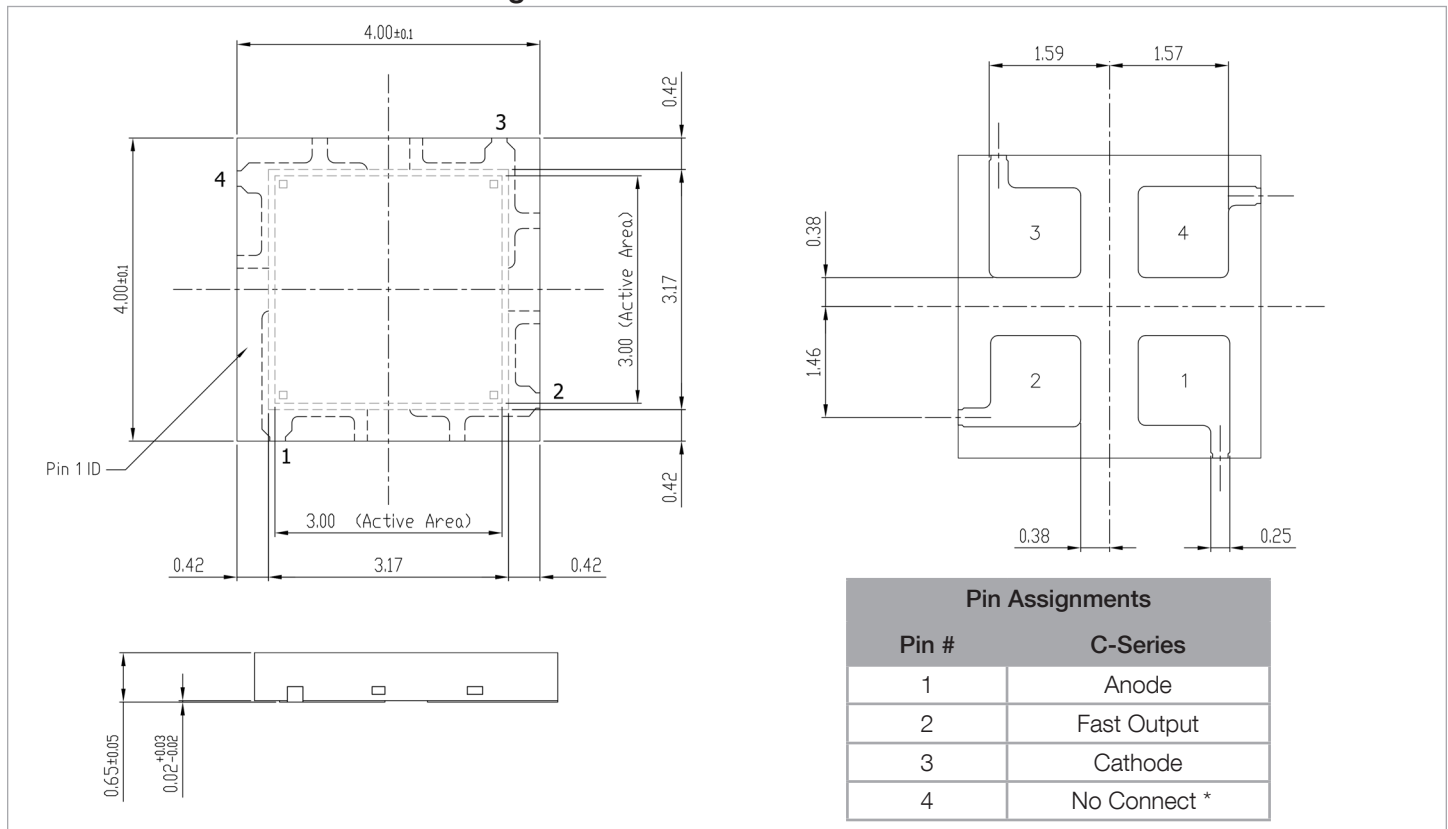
, Solder footprint for the MicroFC-600XX-SMT part. All dimensions in mm.
